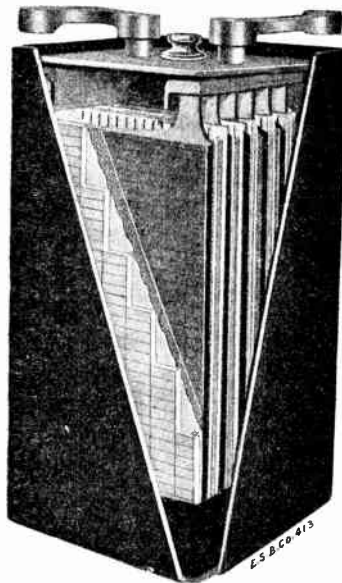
Cutaway View of an Assembled “Exide” Lead Cell.
